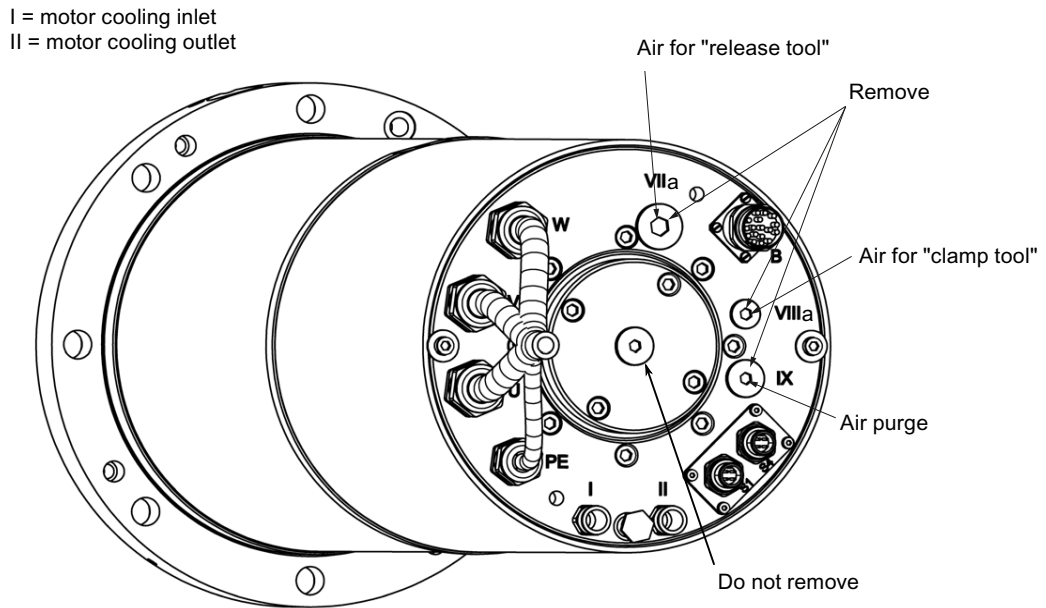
ECS-M pneumatic 2SP120x-1Hx2x-xxxx without rotary gland
